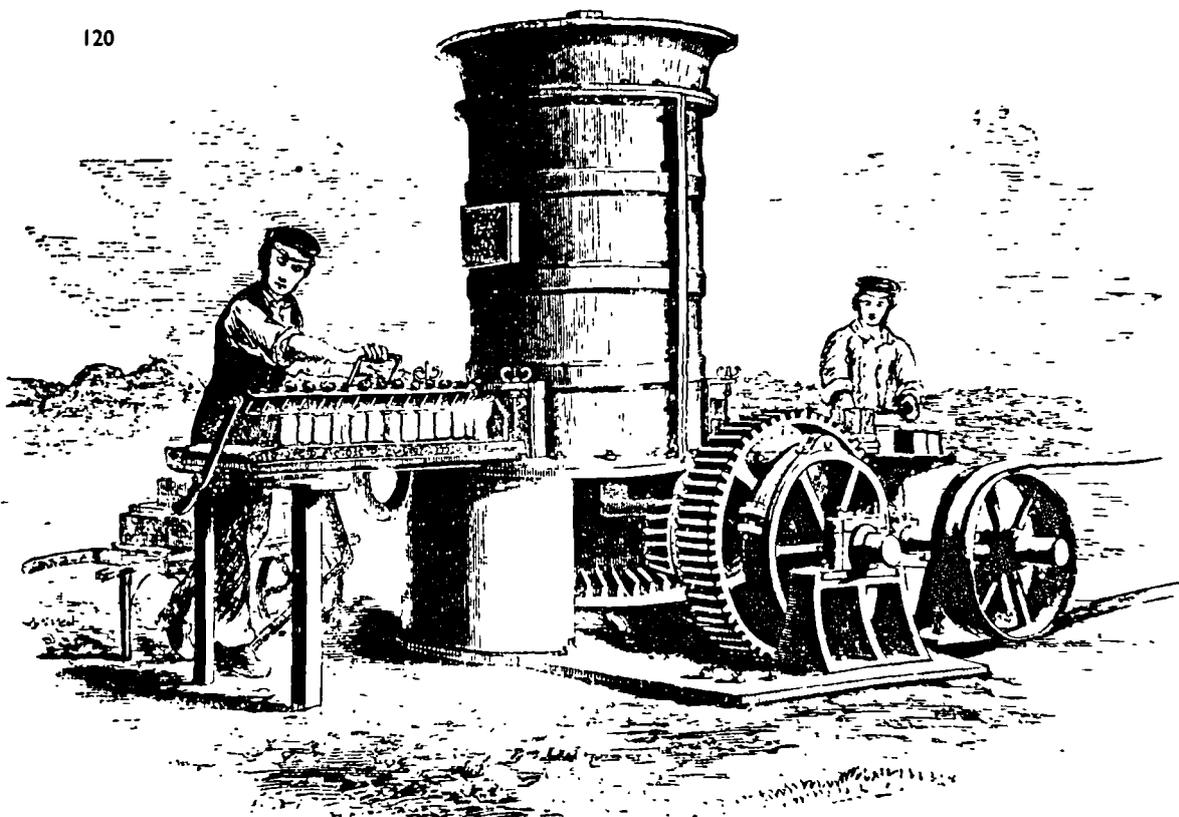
Extrusion brickmaking machine attached to a pug mill, Bulmer and Sharp, manufacturer, c. 1860.
